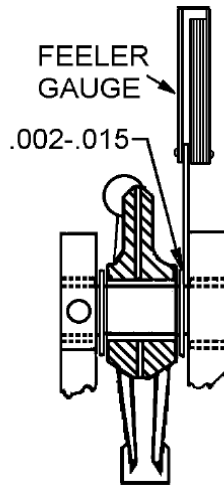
Updraft Cylinder Rocker Arm Side Clearance
